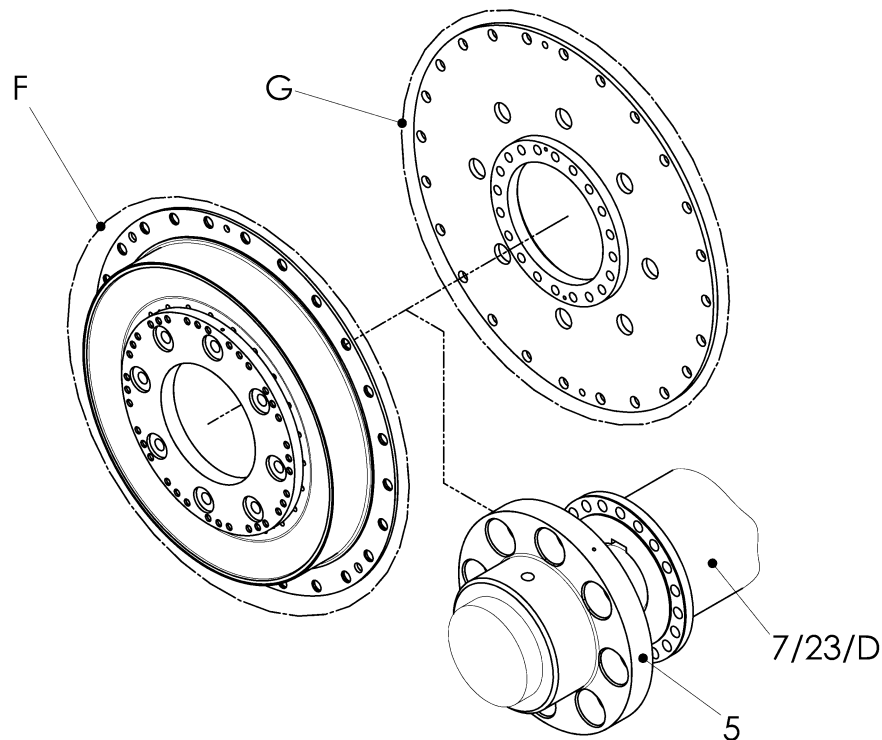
Positioning the rubber element assembly and the CX-flange assembly
